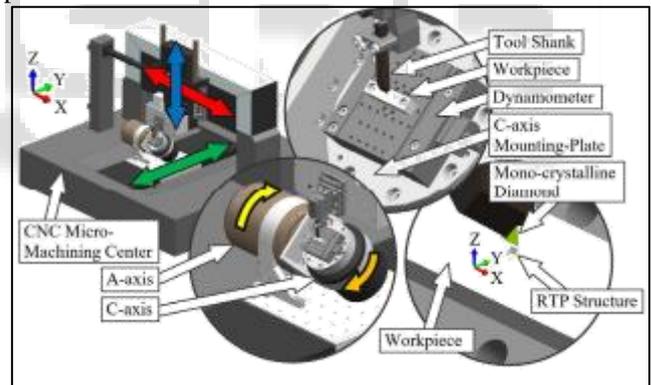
Experimental Setup: Five-Axis Micromachining Center, Tool, Dynamometer, & Workpiece
